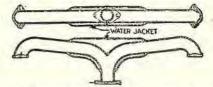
Top and side view of a water-jacketed inlet manifold.
